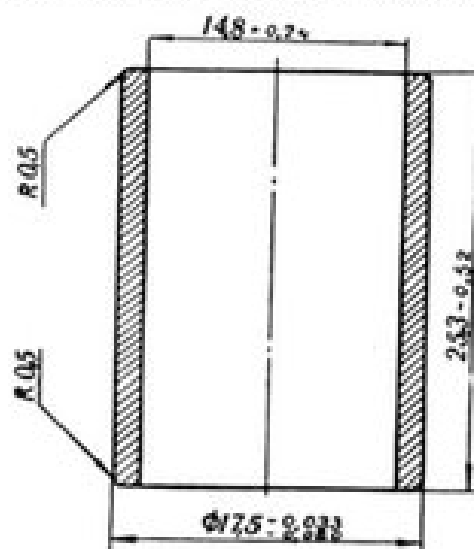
HЖ-П-3 (П-2) connecting rod small end bush.
